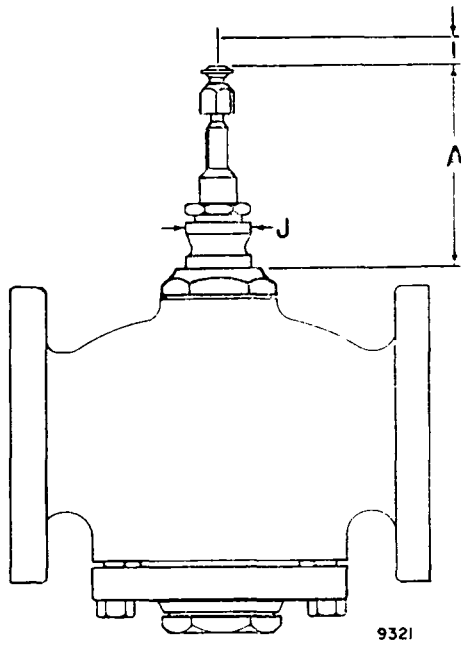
V5011A and D Flanged Body Dimensions in Inches (Millimeters) Refer to Table 3
